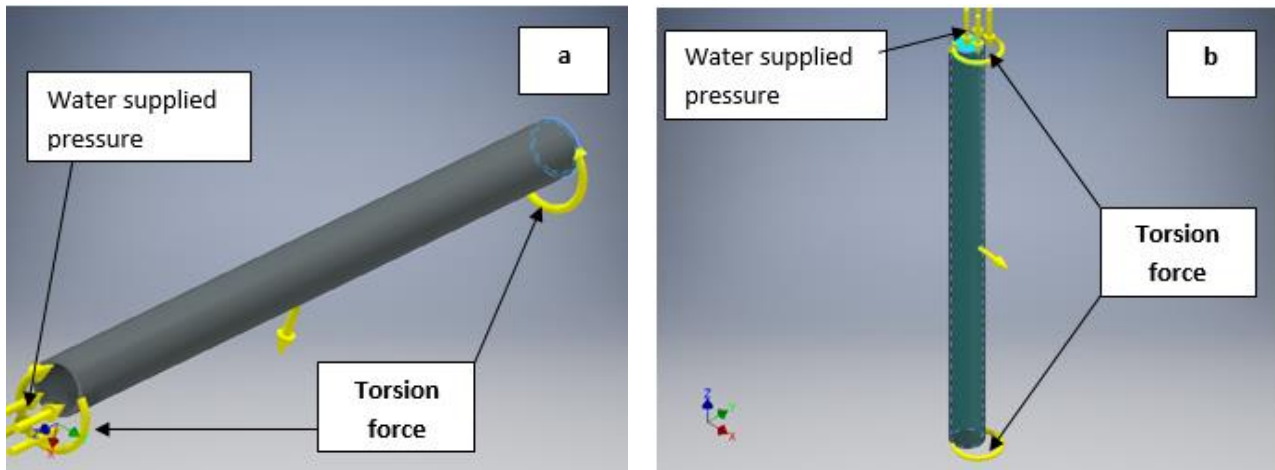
The 3D of the applied loads of (a) the drilling pipe wall, (b) the water conveyed inside drilling pipe
